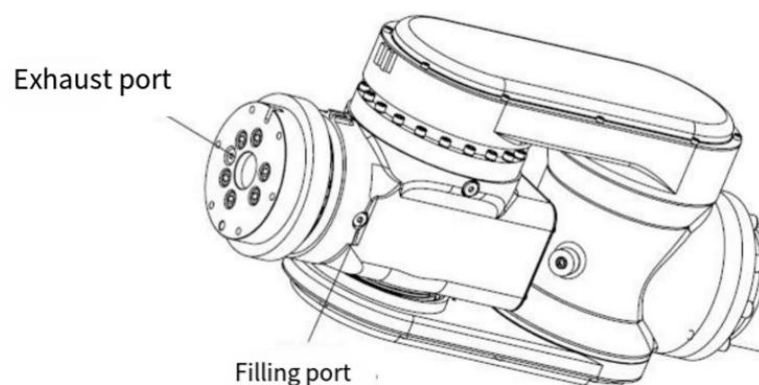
Lubricant Replacement for J6 Shaft Reducer
